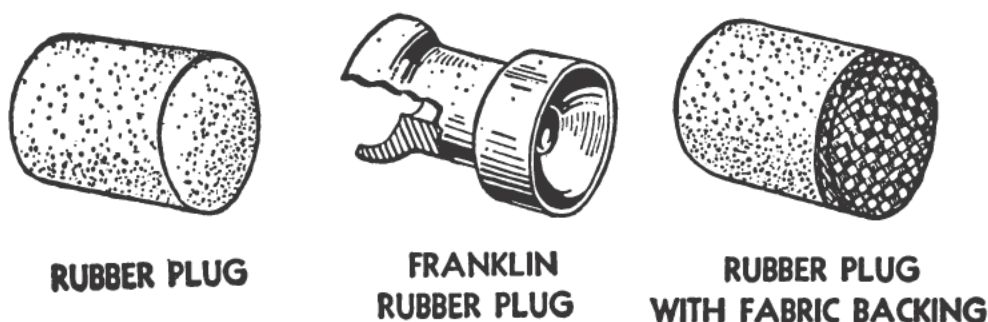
Typical rubber plugs used for cleaning inside of condenser tubes.
